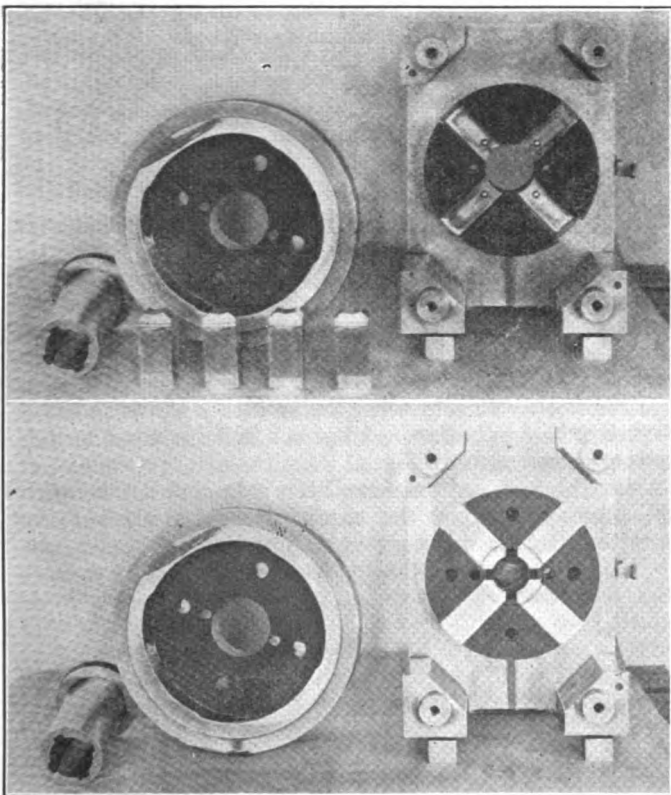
TWO VIEWS OF THE DIE USED TO PRODUCE THE SPLINE SHAFTS
